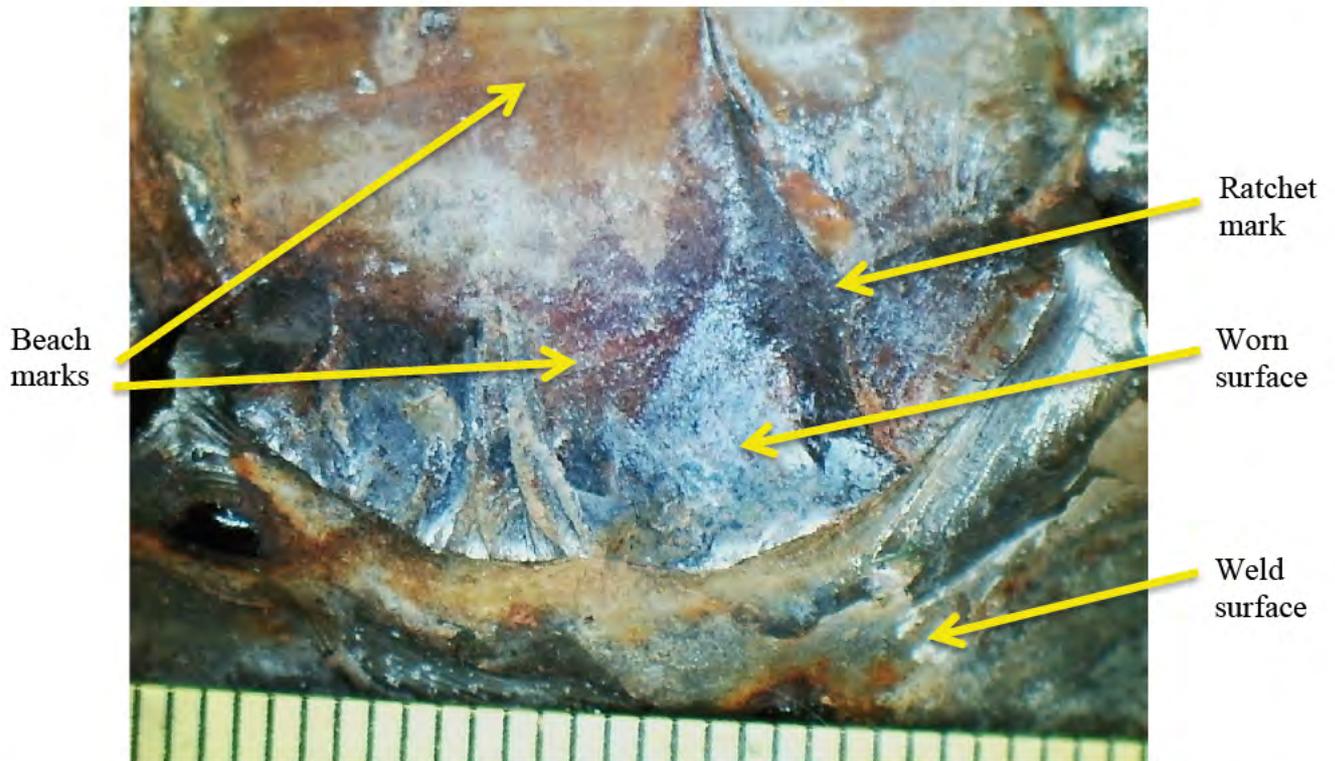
Macroscopic image highlighting the presence of beach marks tracking back to multiple origins along the outboard side of Rod 2 at the rod weld interface.
